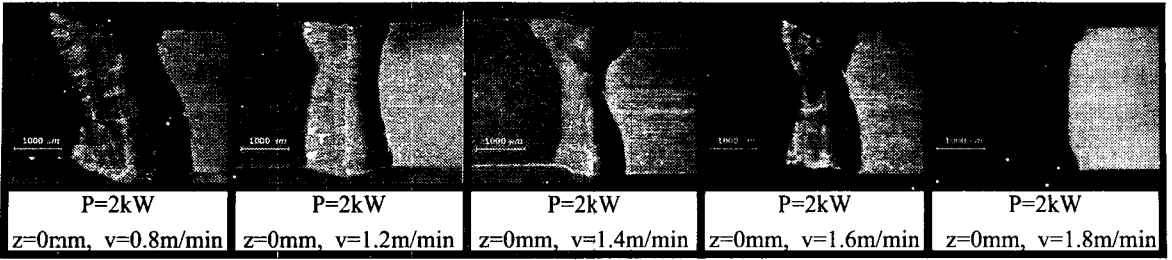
Cross-sectional area of welding according to laser welding speed
